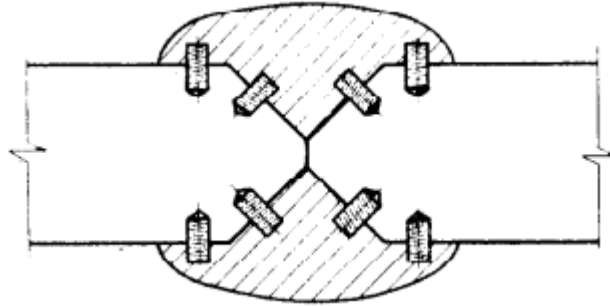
USUAL PROCEDURE OF STUDDING FOR CAST IRON WELDING
